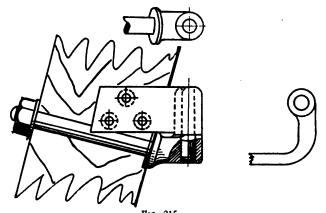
Similar in construction to Fig. 214, but the two parts, instead of being riveted, contact on one face.
